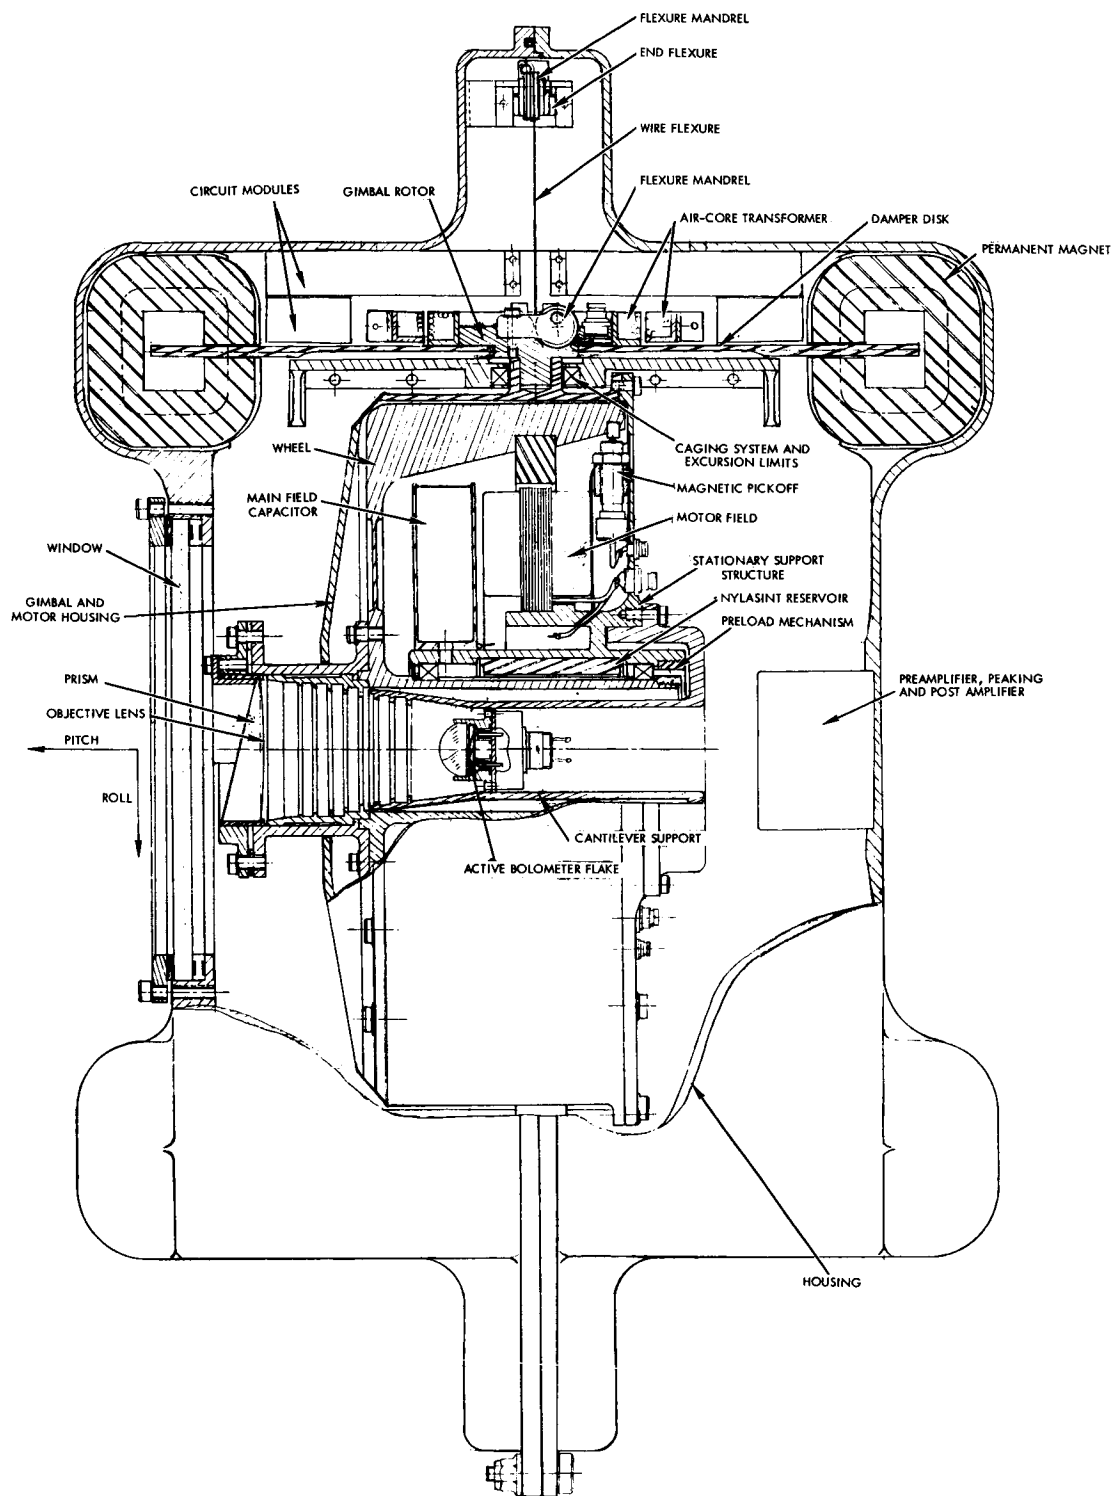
Controller Design with Eddy Current Damper and Wheel-Mounted Bolometer
